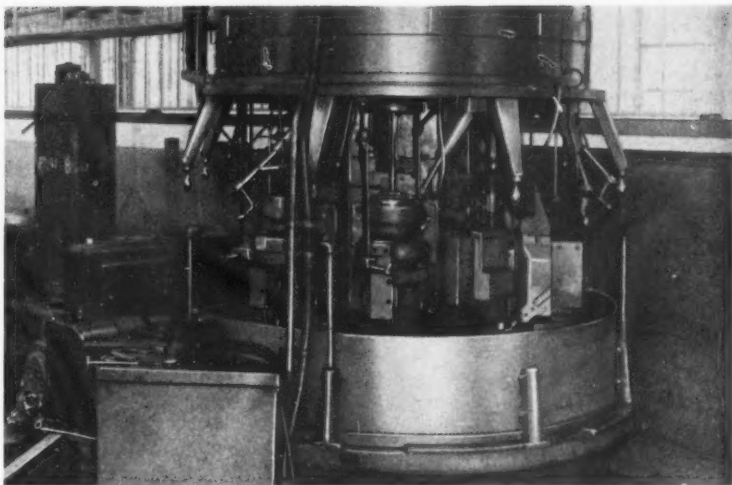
The first Series of Operations on the Cylinder Castings is Carried Out on this Bullard Multi-Au-Matic 8-spindle Machine, on which Each Casting Makes Two Circuits
